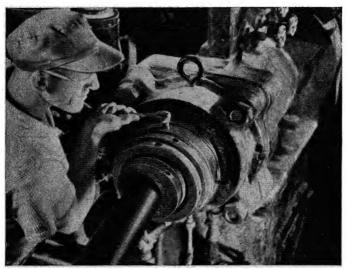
Extruding a rubber tube. The extruding machine, often called a tube machine, resembles a giant food grinder or sausage stuffer.
